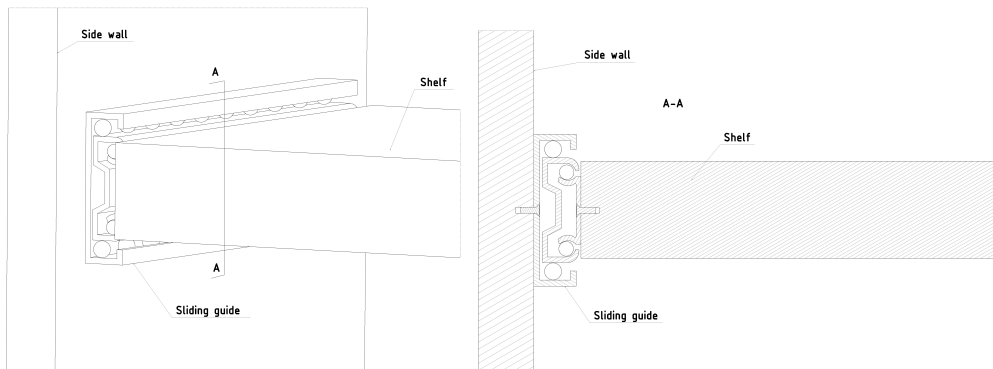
Side wall and shelf connection: shelf installed on the side wall through connection with a sliding guide, countersunk screws used in the installation
